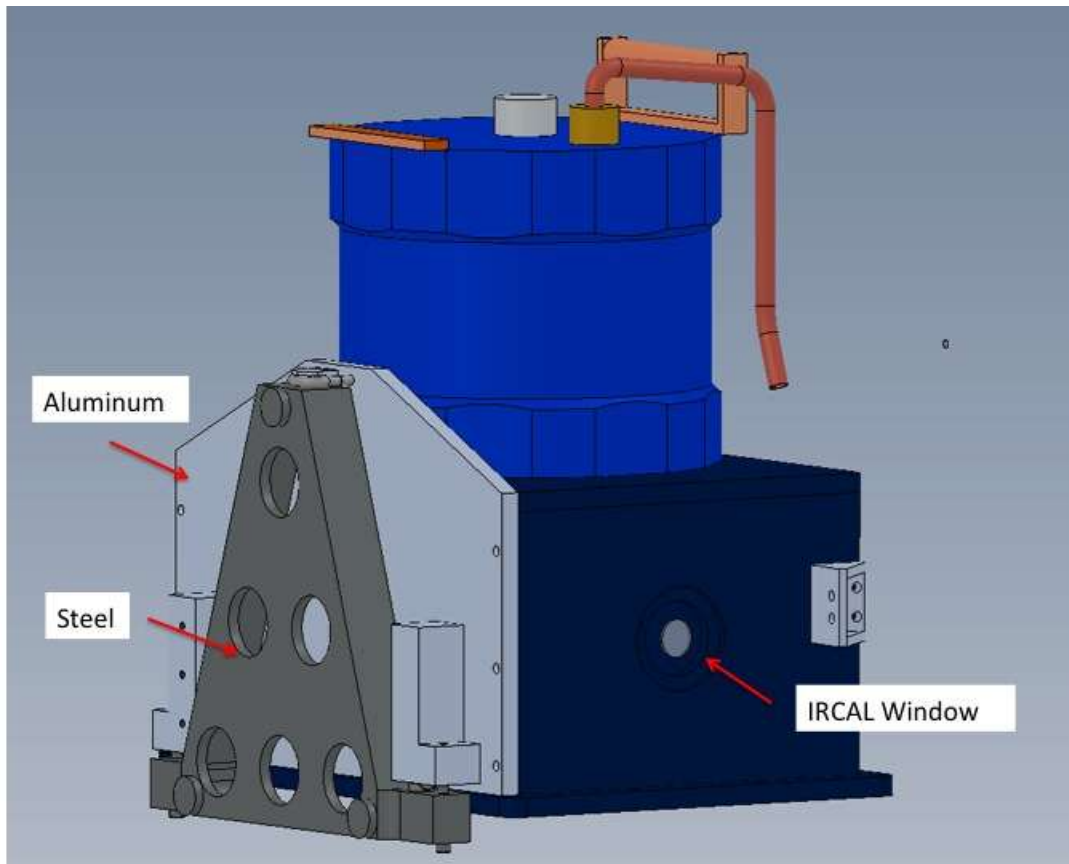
The IRCAL dewar (dark and light blue) in its mounting arrangement. The steel plate will be permanently fixed to the optical bench, the aluminum bracket will be permanently fixed to IRCAL, and the two plates will couple kinematically.
